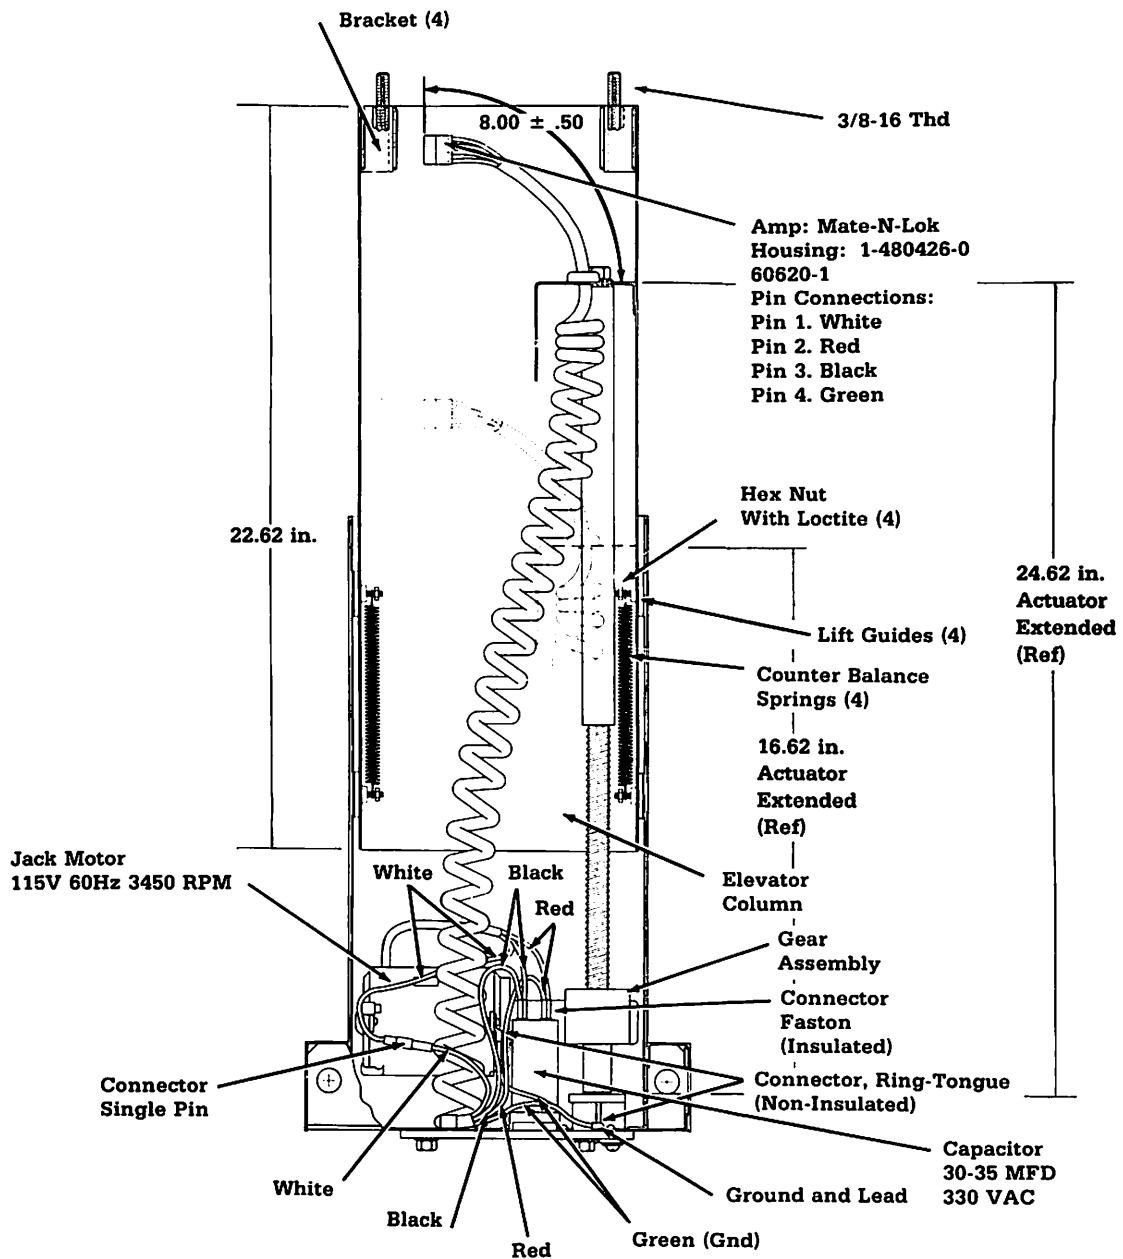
Cut-away, Internal Side View; Cable and Wiring Connections
